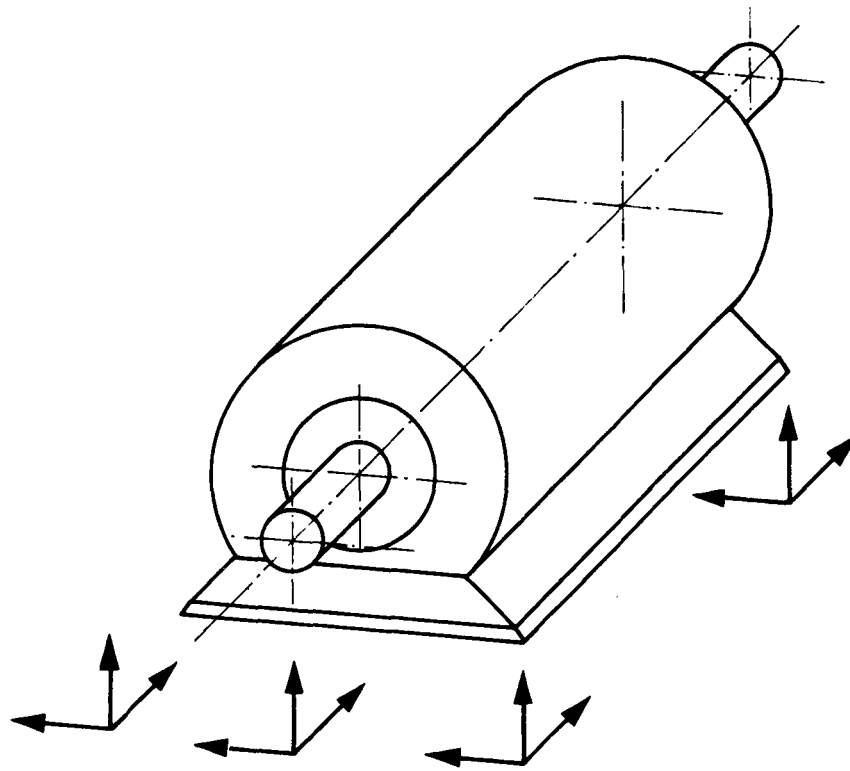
Possible measuring points on a small machine (Measuring directions on bearings, supports and flanges)
